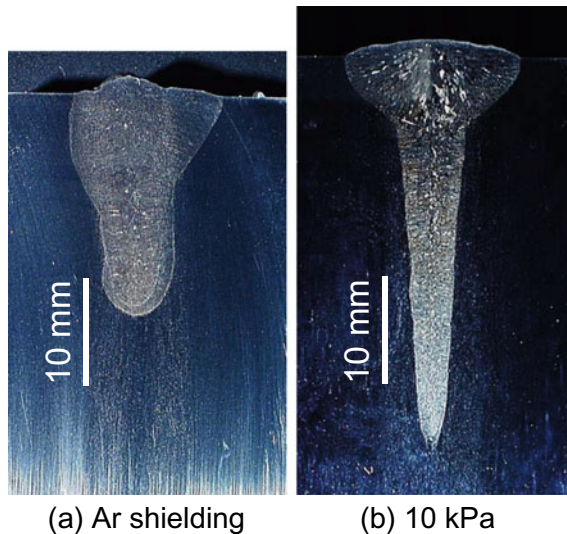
Cross-sectional photos of laser welds in type 304 steel produced with 10 kW fiber laser at 0.3 m/min in Ar shielding gas at 1 atm (a) and under low vacuum of 10 kPa (b)
